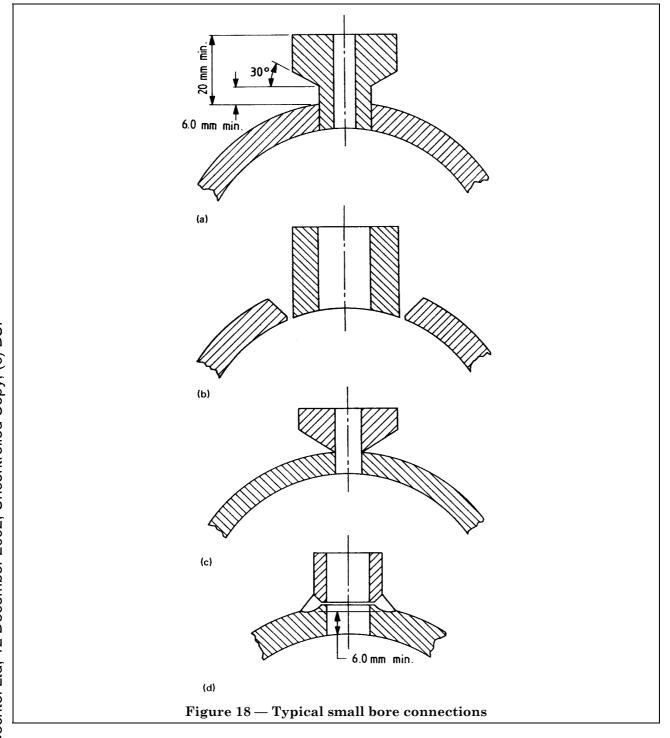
(b). This type of connection is made from screwed sockets, couplings or tube shaped to suit the bore of the main pipe.
